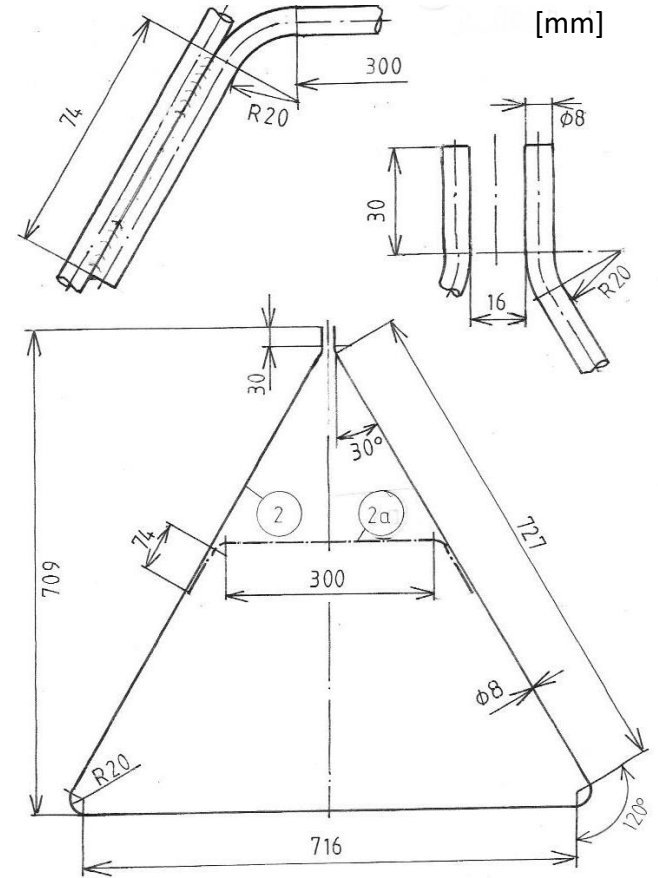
Vertical Stand (2) and welded-on Stiffener (2a); all parts in one plane
